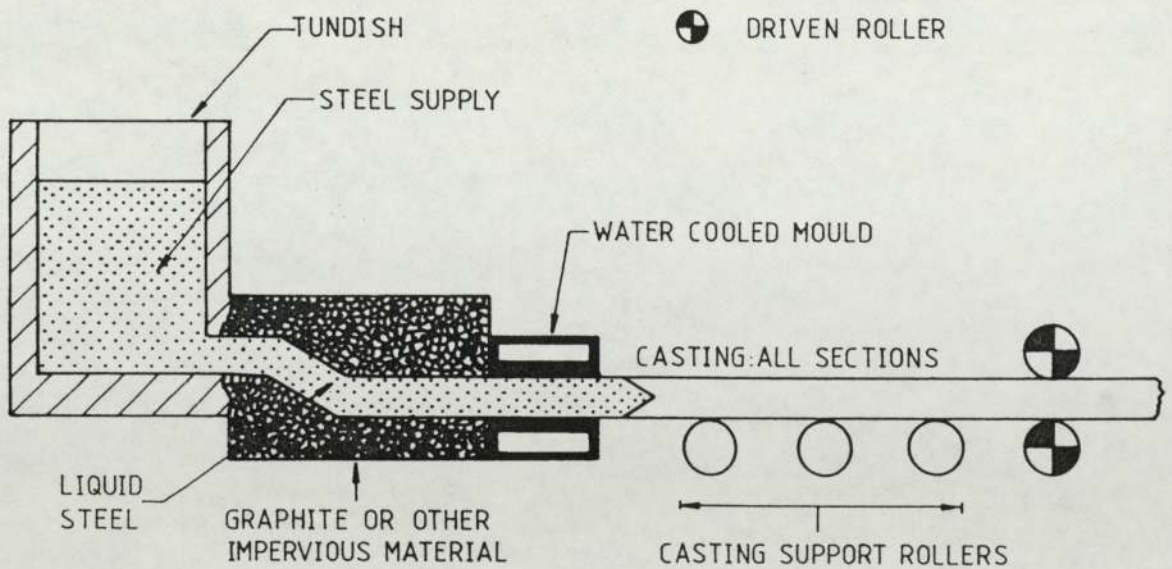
OUTLINE OF HORIZONTAL CONTINUOUS CASTING MACHINE.
